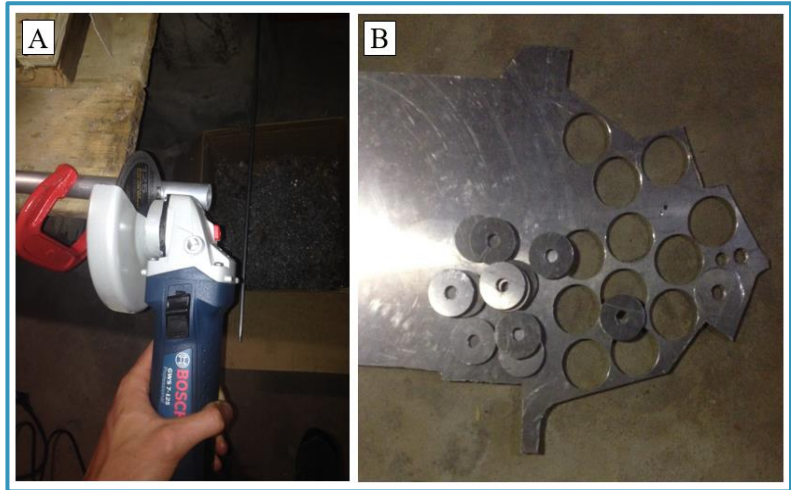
A) Cutting lengths of tube, B) Large washers drilled from plate
